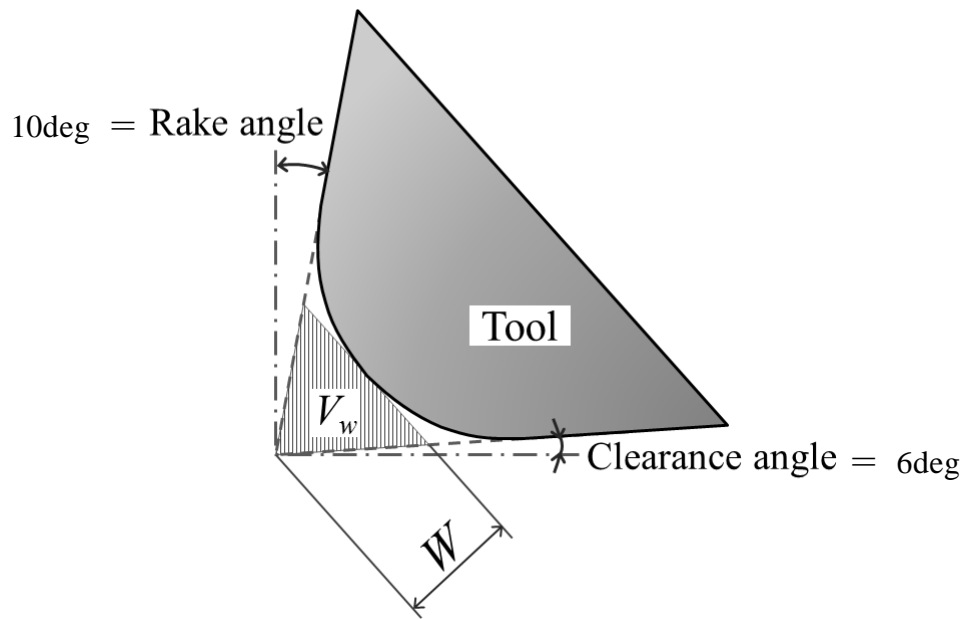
Cutting edge and volume of tool wear,  $V_w$
